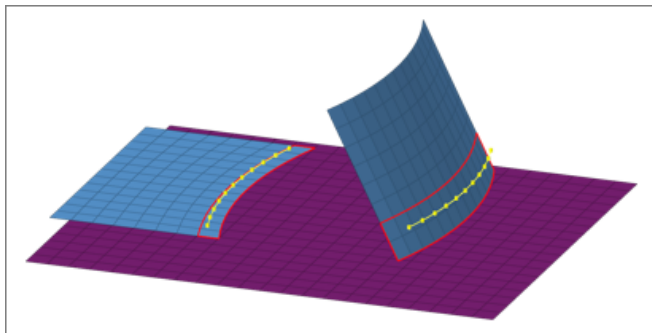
Original Model before Realization Initial situation with one element row marked for the lap weld and two element rows for the t weld.
